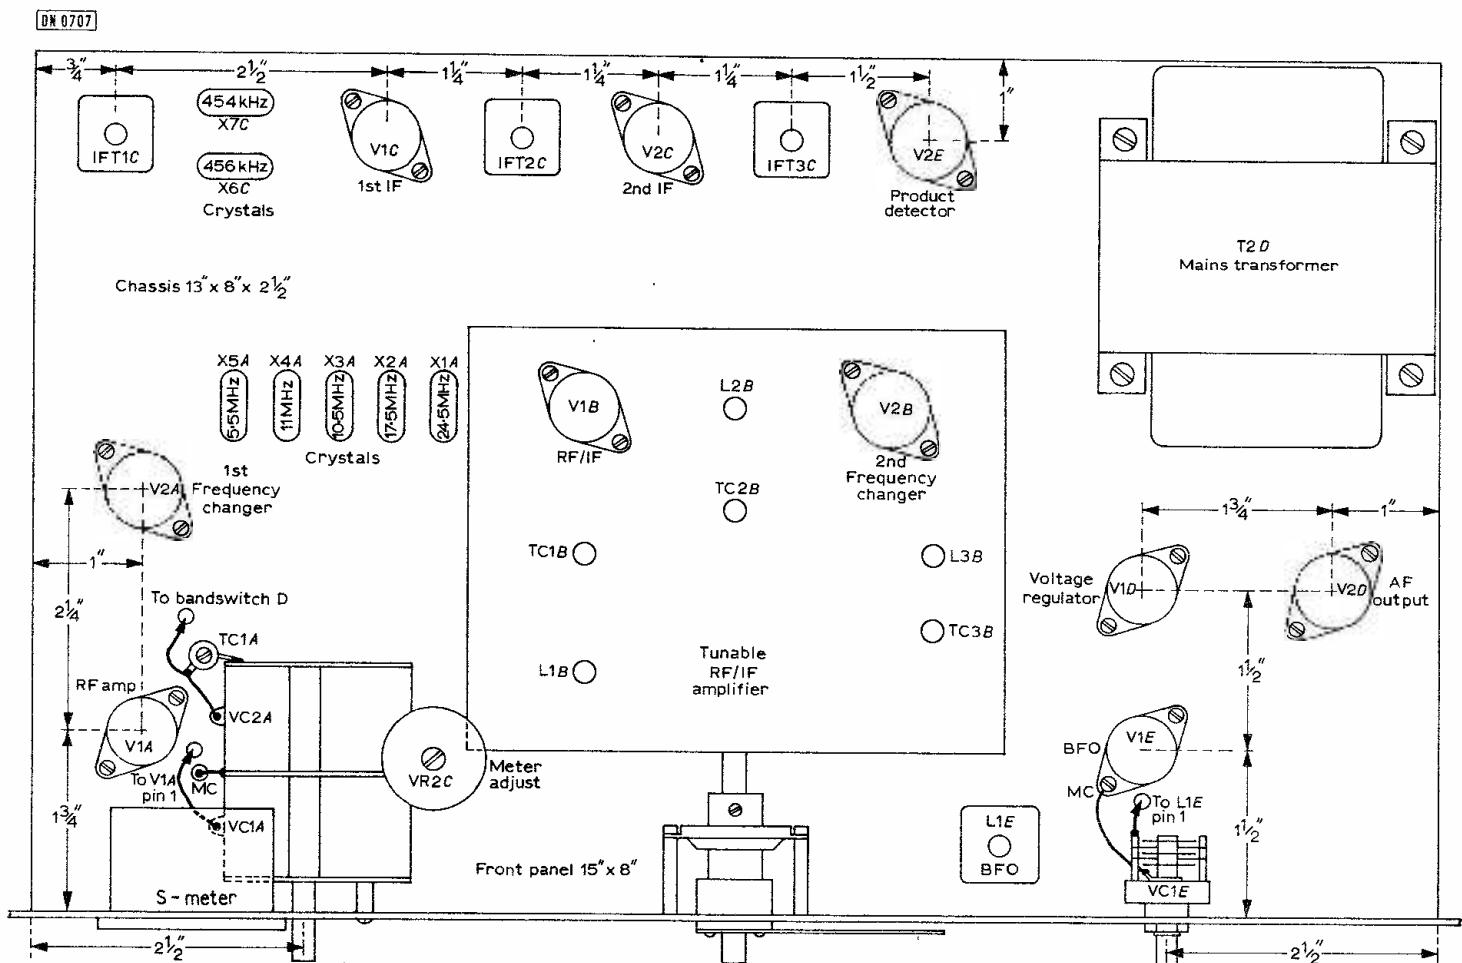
Top of the chassis with drilling information. The photograph on p. 695, Part 1, will assist in identifying components.
